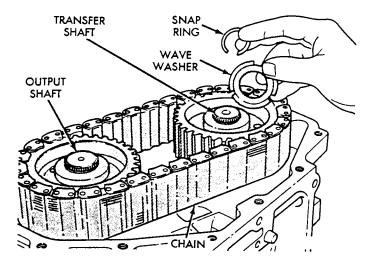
Remove Transfer Shaft Sprocket Snap Ring and Wave Washer
